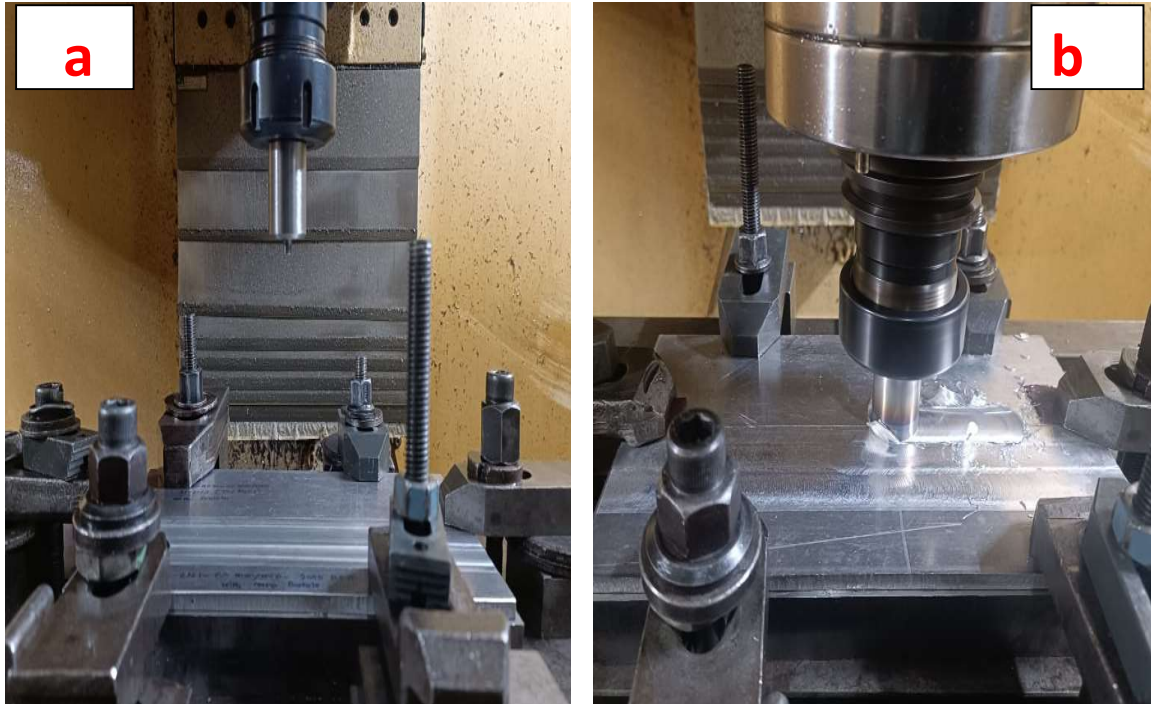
(a) Clamping of diff grade Plates for FSW Welding in Milling Machine by FSW Tool Mounted in Tool arbor (b) FSW Welding is running at diff tool rotation
